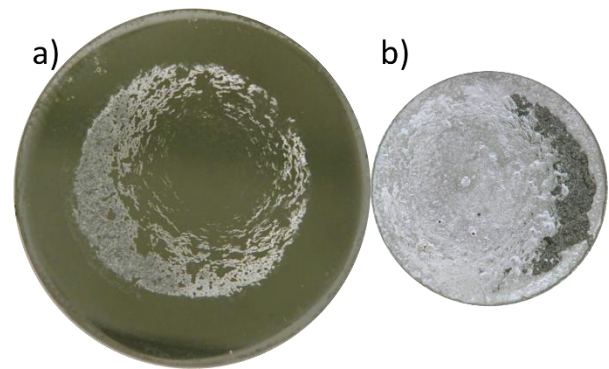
LOM Image of the CrAlN-Al a) sample and b) casting contact surfaces after the detachment test
